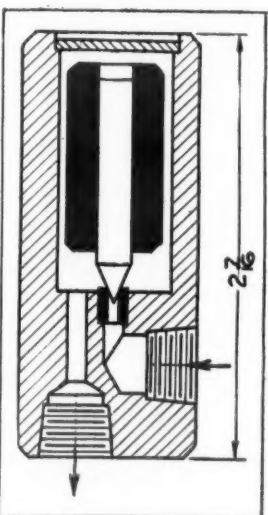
Pressure reducing valve offered for high side float systems with bottom-mounted units.
